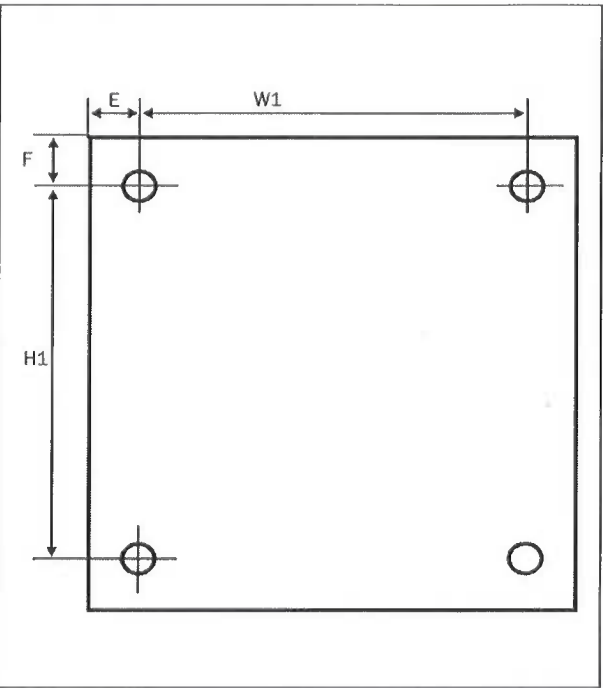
Hole pattern for screw attachment, MSF-310 to MSF-835. Hole distance (mm).
